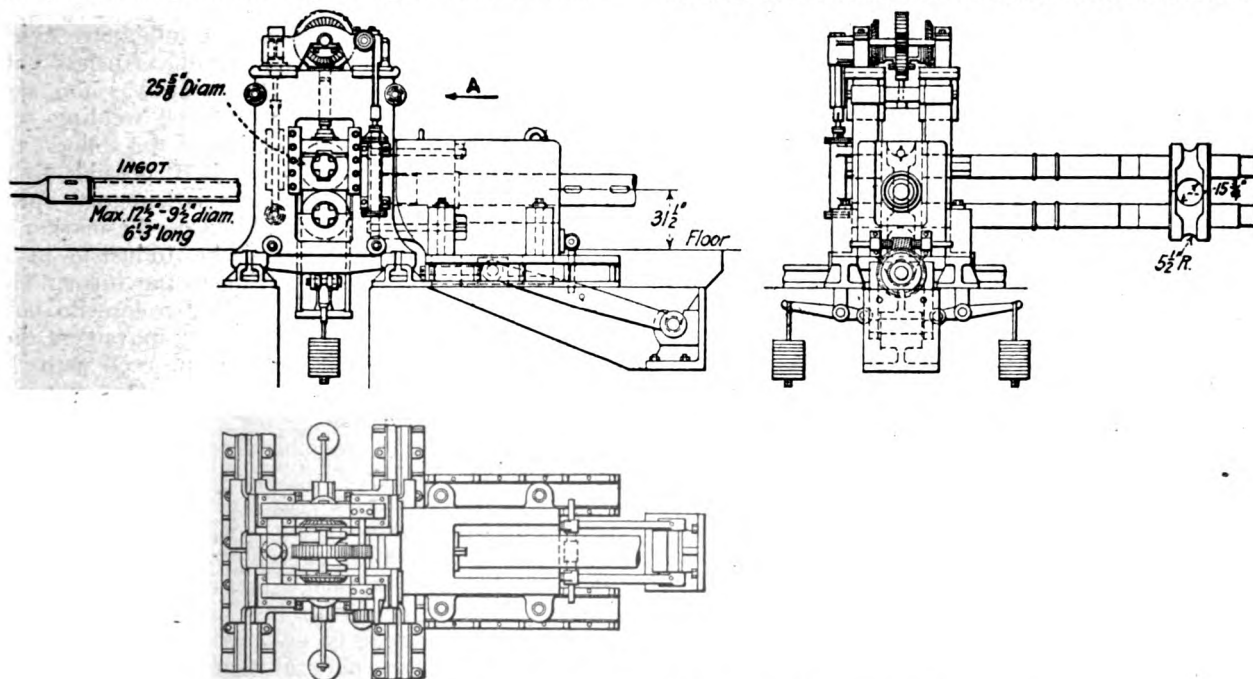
Elevations and plan of a 25-inch Pilgrim step rolling mill.
